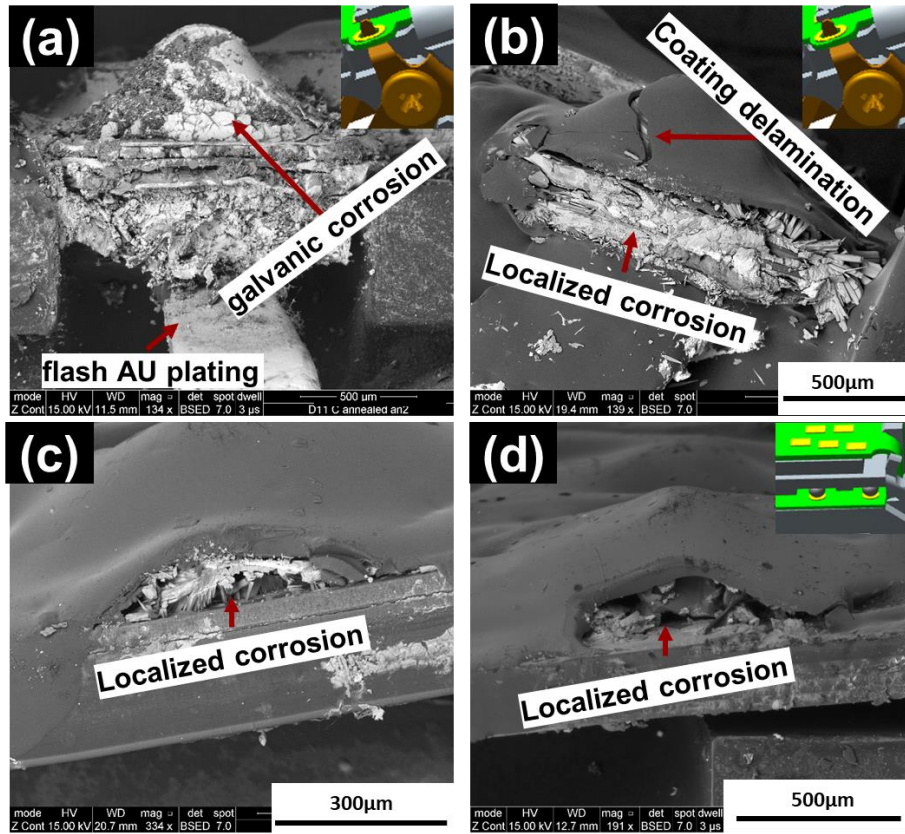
BSED electron image showing: (a) Galvanic corrosion of contacts soldering, (b) Conformal coating delamination, (C and d) Localized corrosion of microphone solderings.
